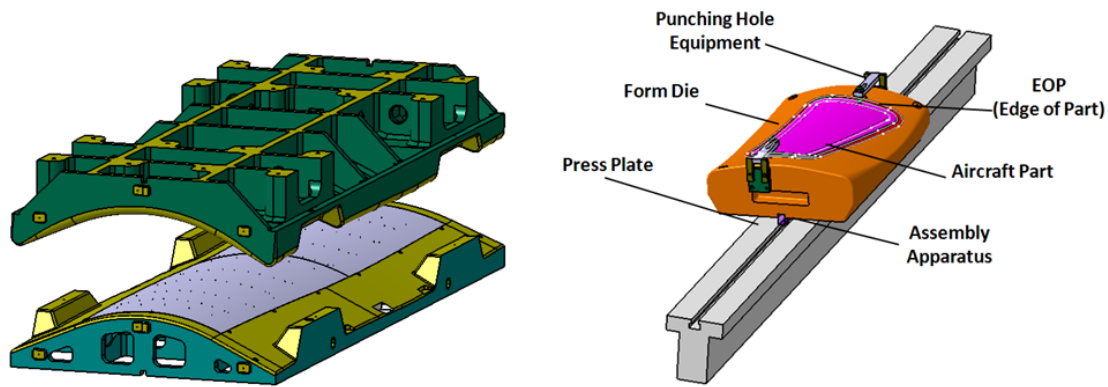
Stretch forming die (a) which consists of ram and form die, (b) which consists of only form die
